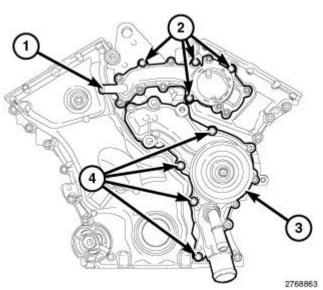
Coolant Outlet Housing Gasket & Water Pump Gasket Courtesy of CHRYSLER GROUP, LLC
